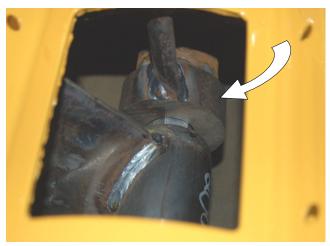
BEARING REPLACEMENT (Hanger Bearing)
